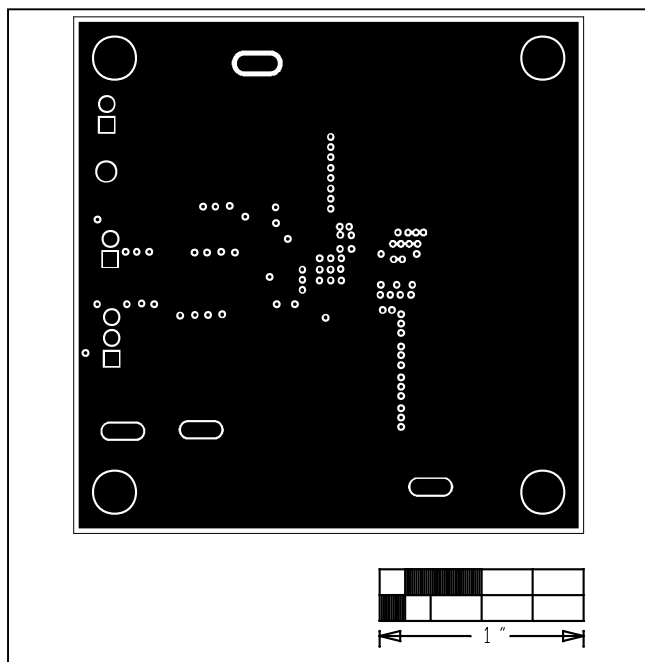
MAXM17543 EV Kit PCB Layout—PGND Layer 2
